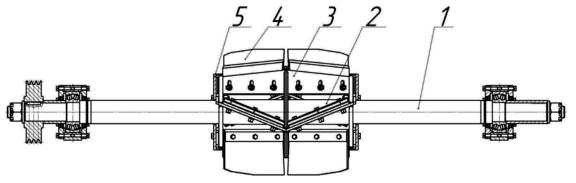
Blade rotor of mixer: (1) shaft; (2) drum; (3) removable blades; (4) flexible blade elements; (5) lock
